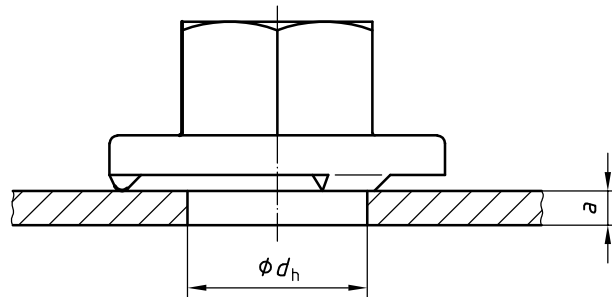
Connecting dimensions (nut not welded on)
